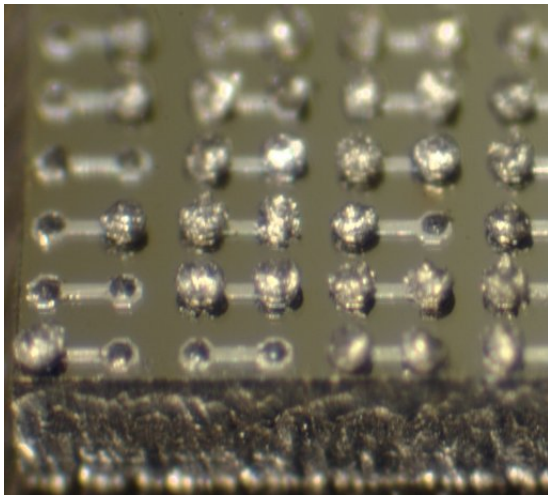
Dummy chip after desoldering. Some solder balls remained on the substrate.
